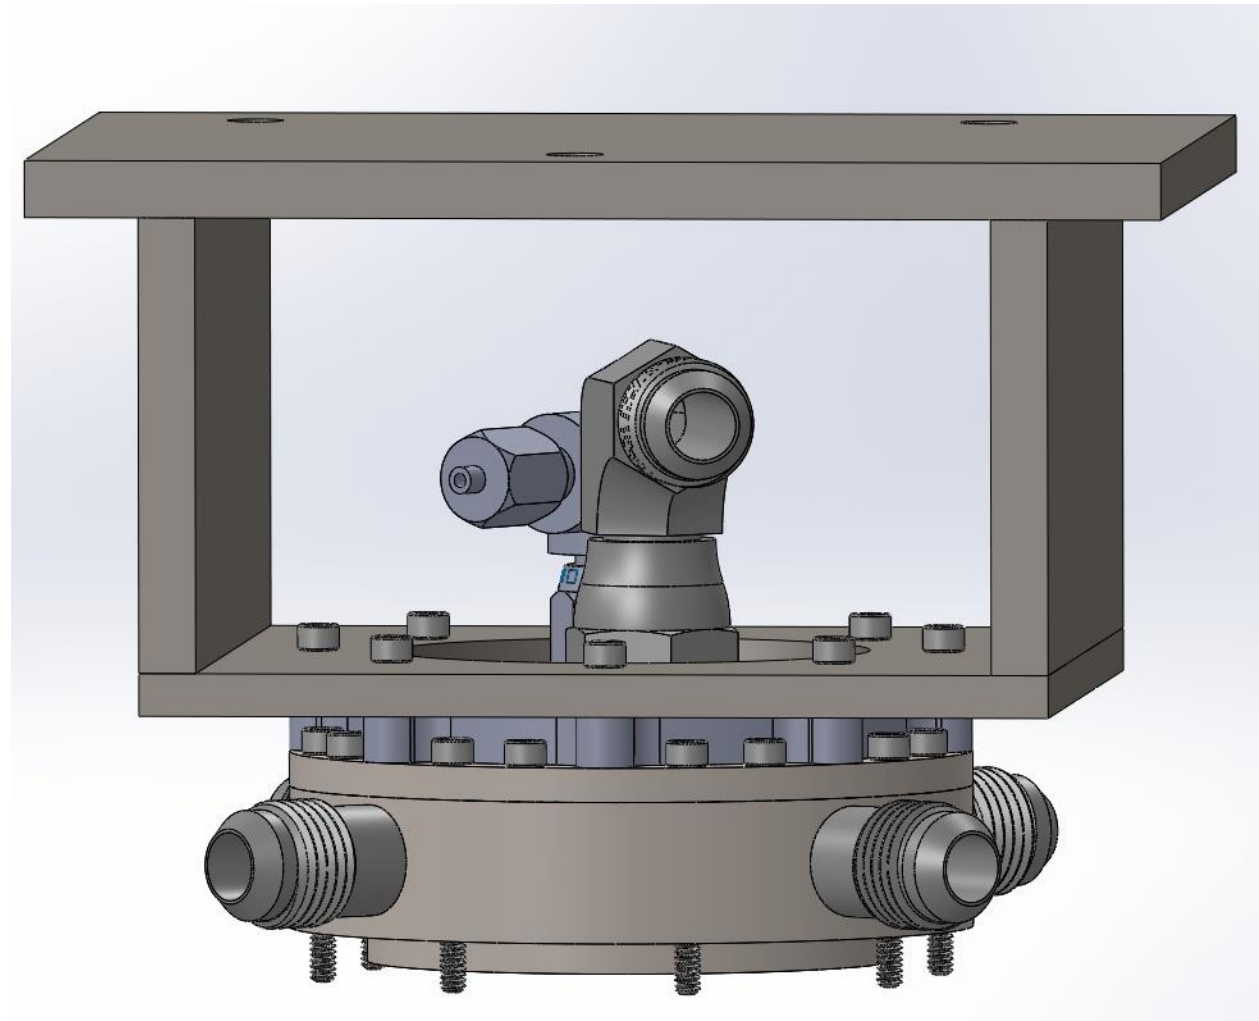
Complete injector assembly with thrust take-up structure. The light-grey spacer plate allows the structure to clear the bolt heads in the injector plate.
